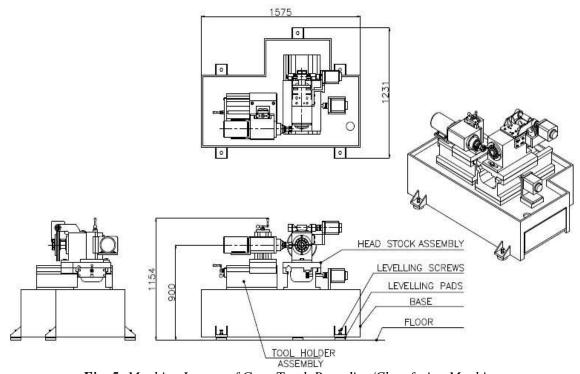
Machine Layout of Gear Tooth Rounding/Chamfering Machine.
